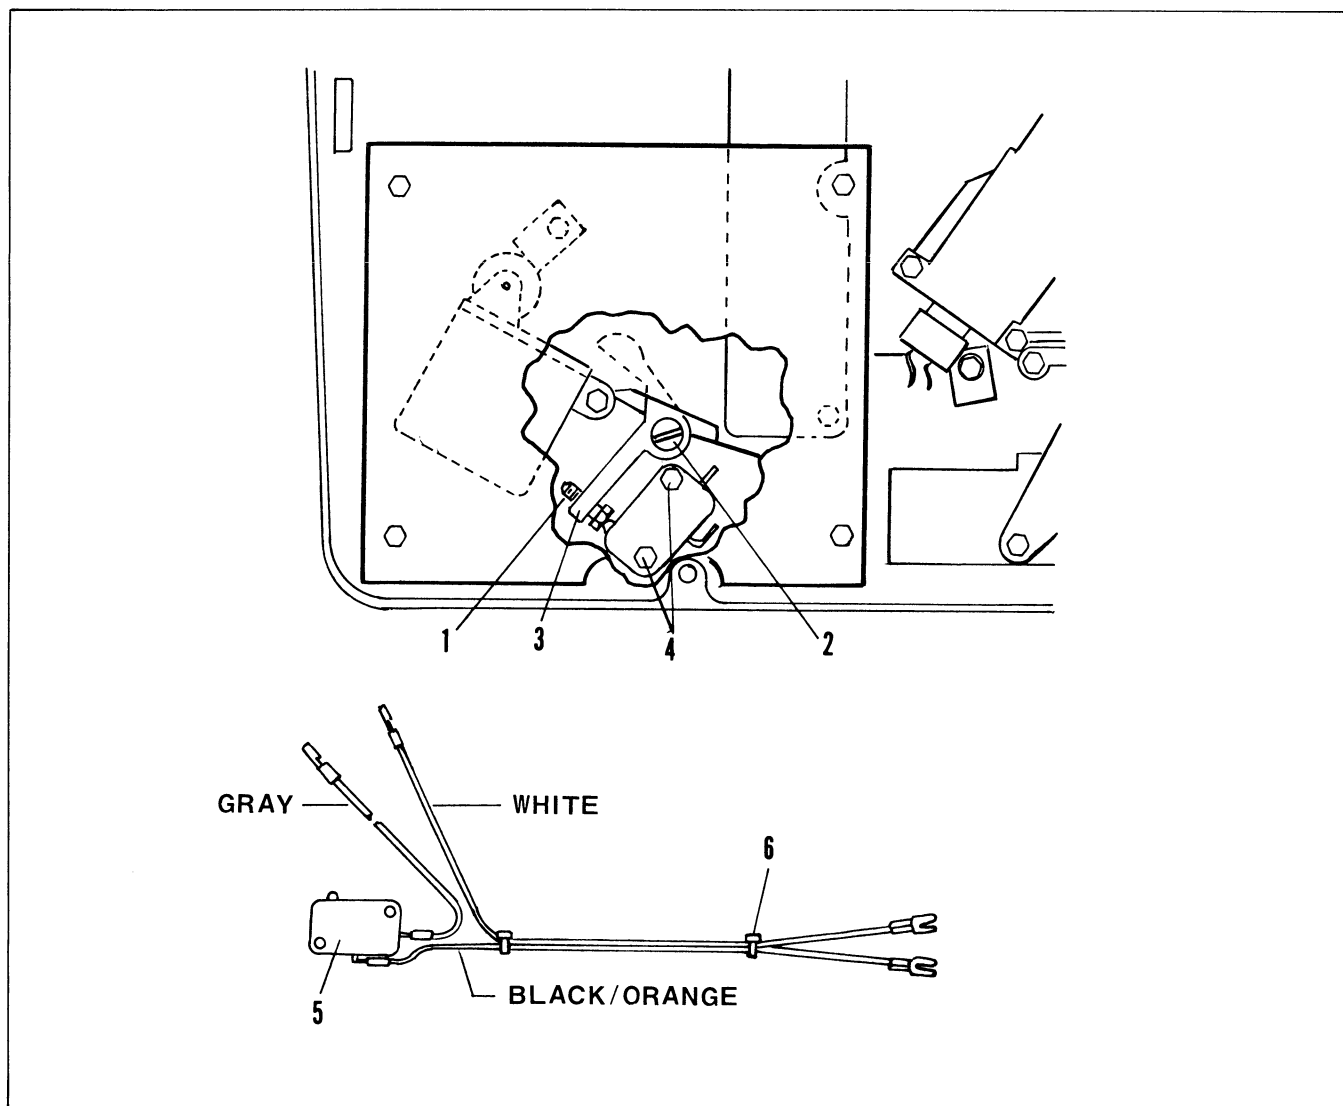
Top Deck Assembly - Homing Switch Components and Connector Wiring (850 Models Only)
